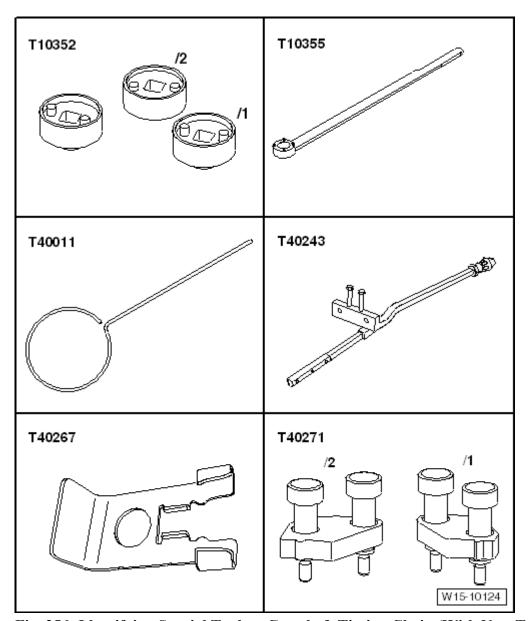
Identifying Special Tools -- Camshaft Timing Chain (With New Tools)
